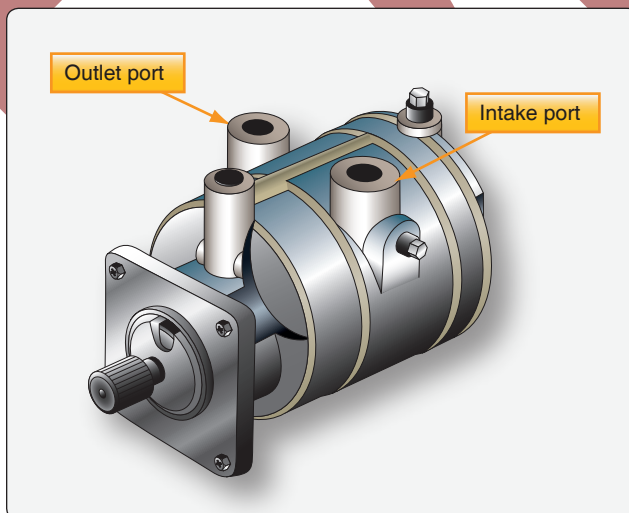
A wet-type air pump with engine oil lubricating ports in the mounting flange.
